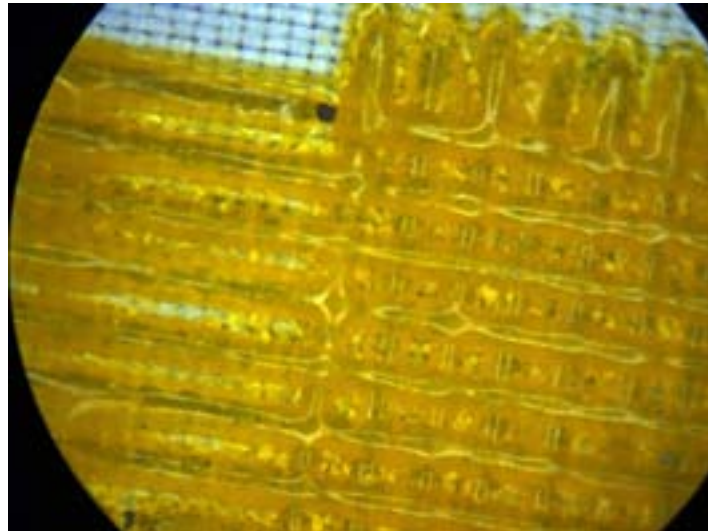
Yellow embossing powders sintered on paper nylon (detail of 1mm tracks in previous image), alternate layers of tracks at right angles, detail. Ridged surface may be seen
